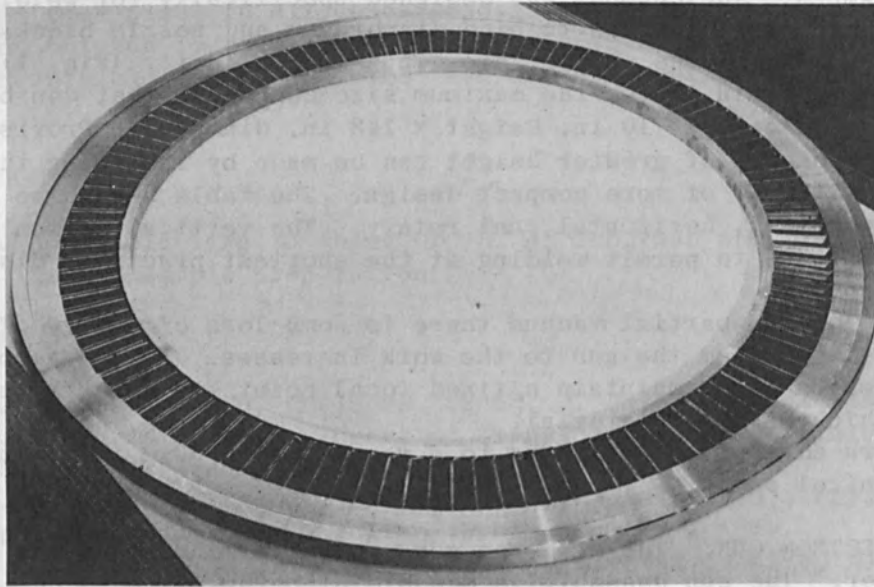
Completed diaphragm assembly after welding and machining but prior to cutting apart.
